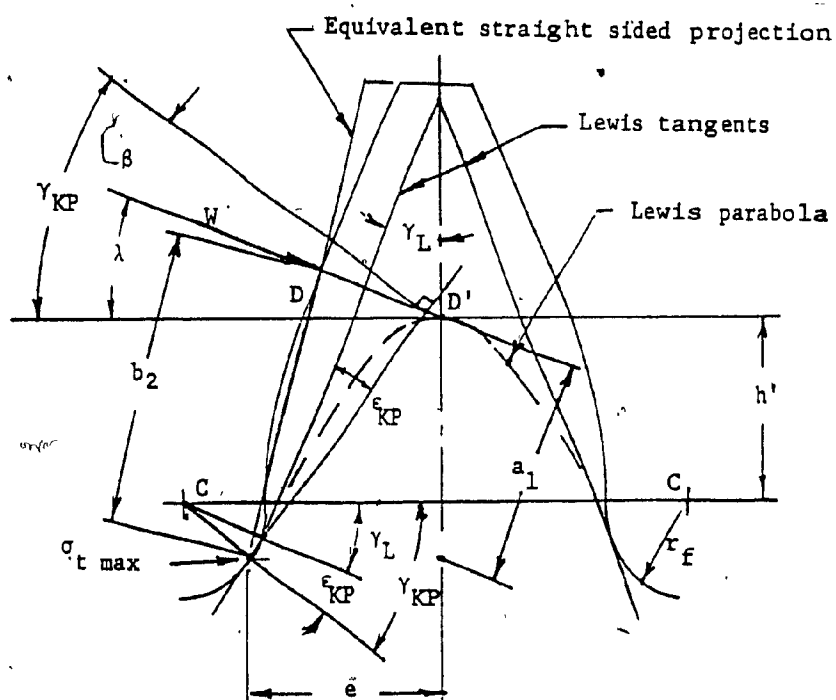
KELLEY - PEDERSEN CONSTRUCTION [20]
